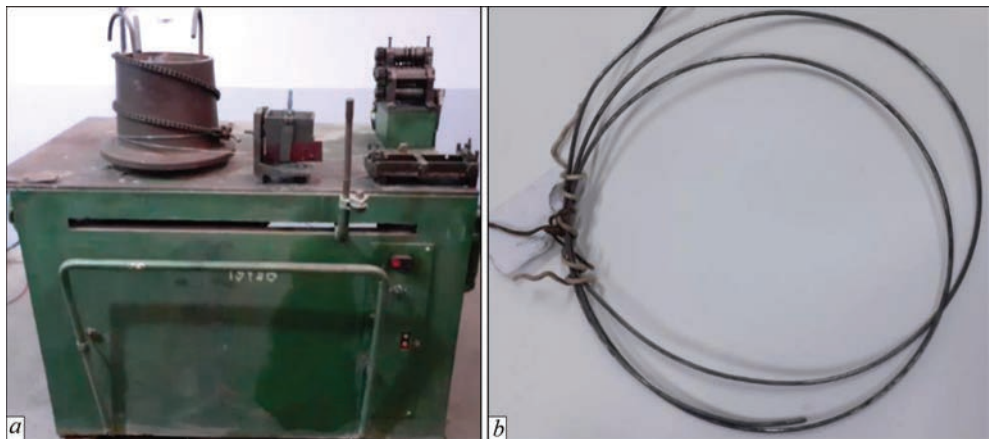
Powder core wire fabrication laboratory setup (a) and fabricated powder core wire (b)
